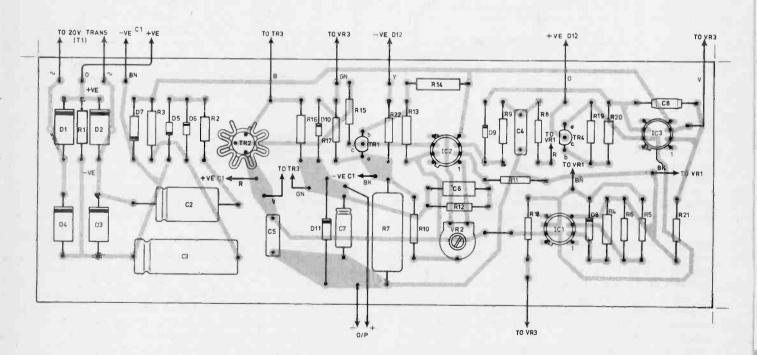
Component layout. If bridge rectifier used R1 can be connected directly to C1
